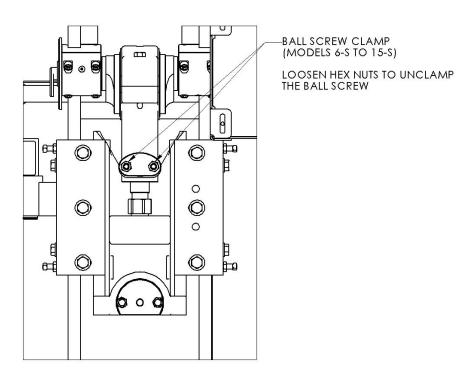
Ball Screw Clamp for Models 6-S to 15-S
